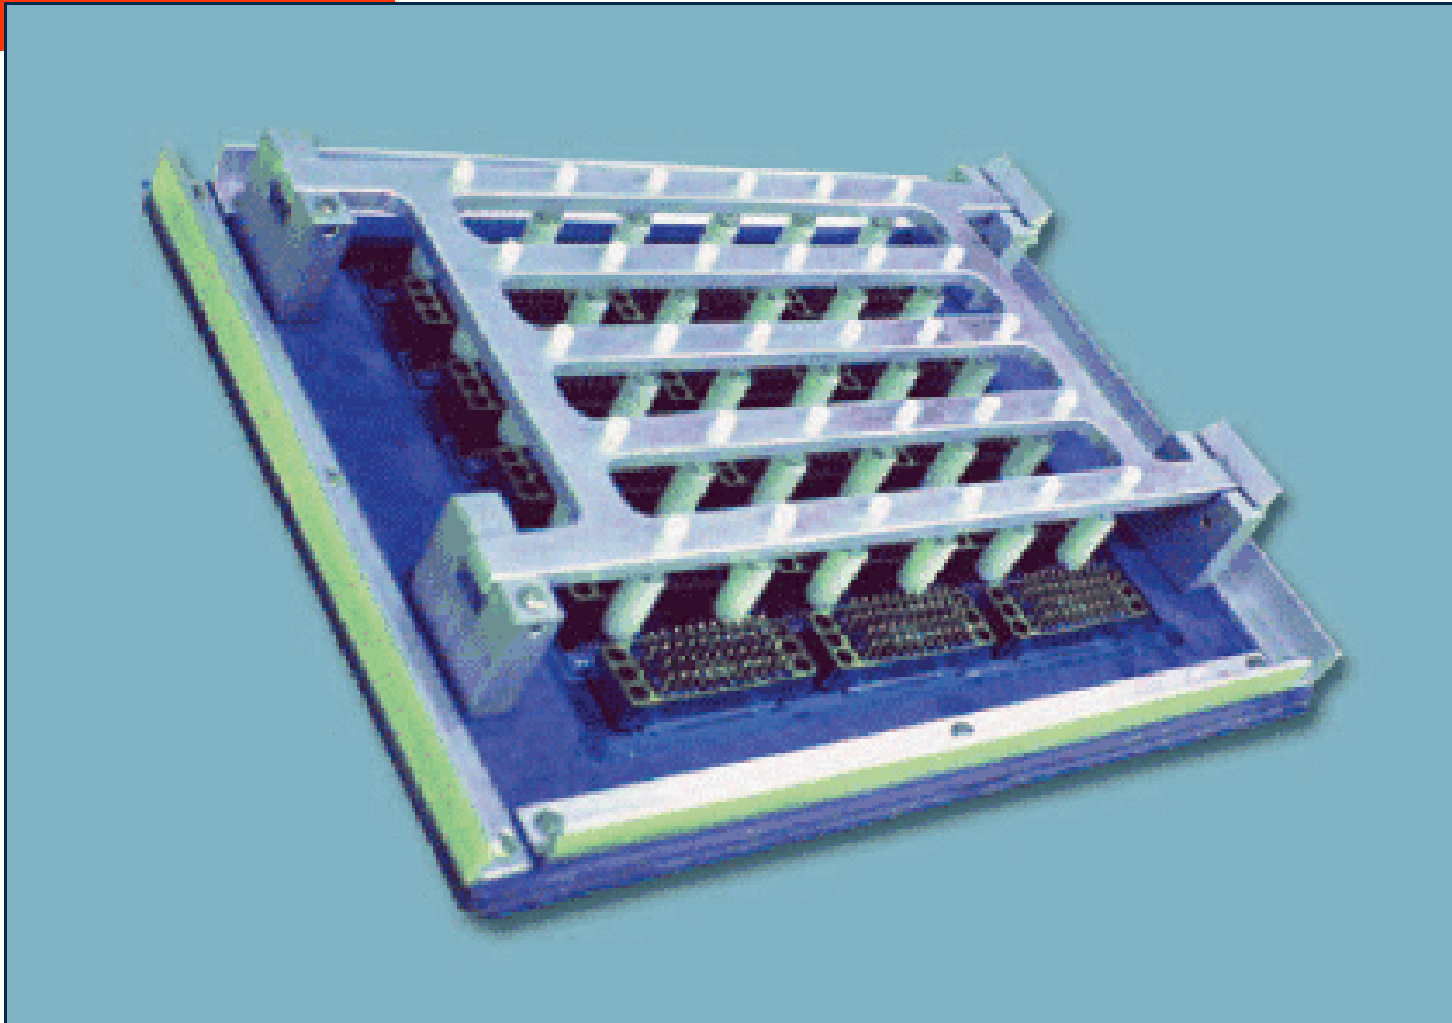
Masking pallet firmly holds the board in place from top side.
